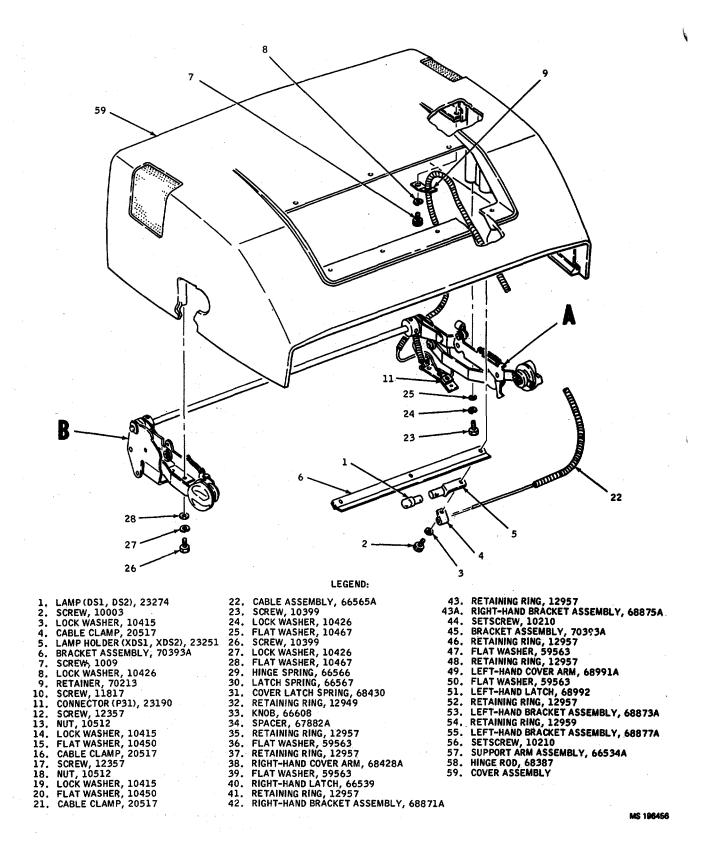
Cover Assembly, Exploded View (Sheet 1 of 2)
